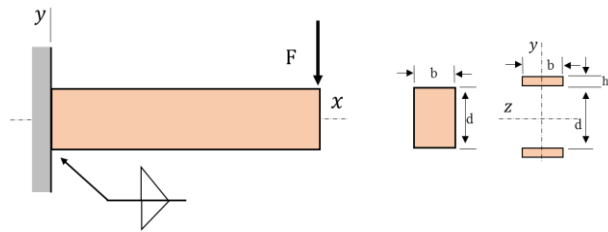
A rectangular cross-section cantilever welded to a support at the top and bottom edges [1]
